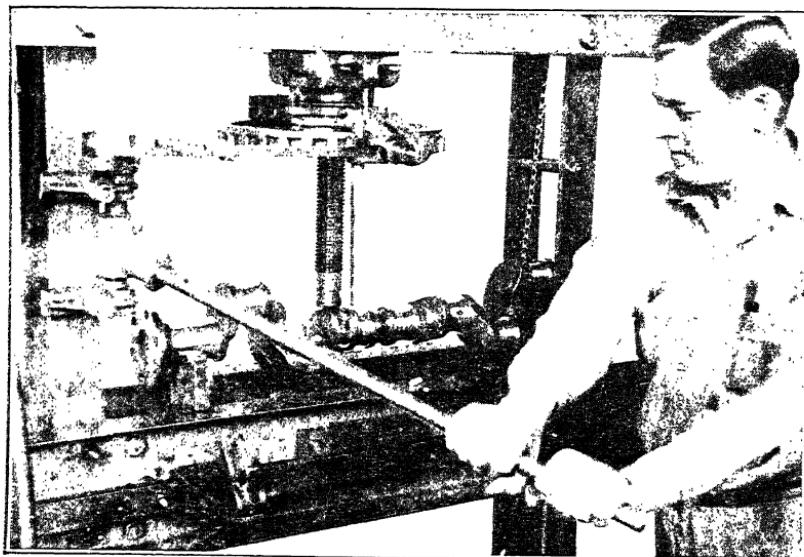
Using an Arbor Press to Straighten a Crankshaft
